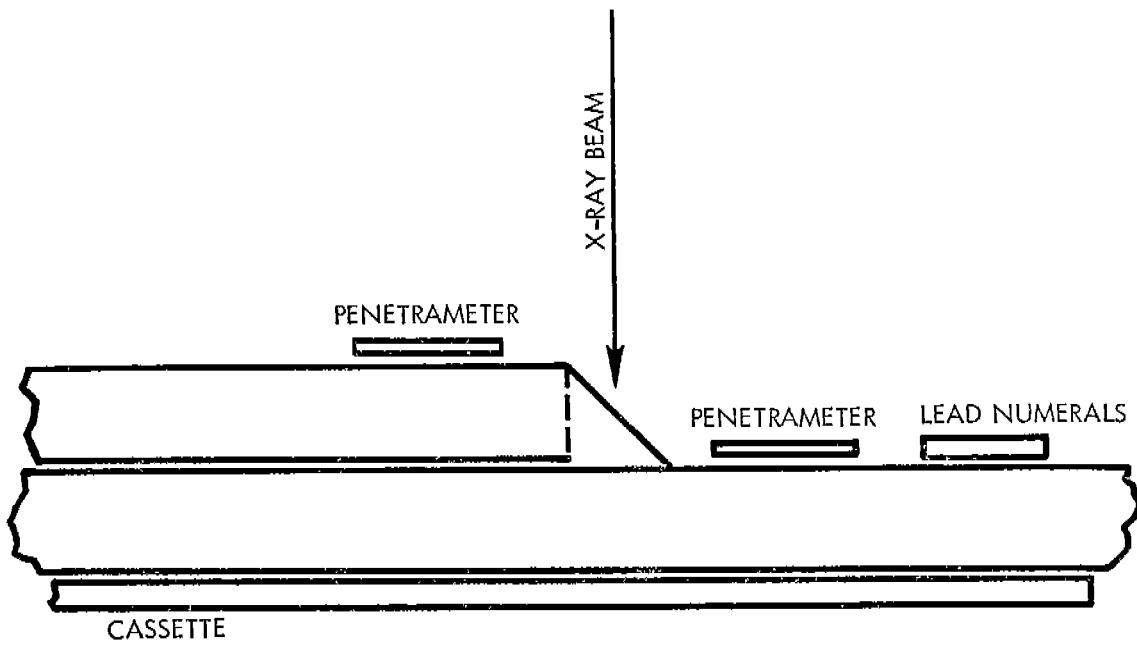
A ARRANGEMENT FOR PERFORMING RADIOGRAPHY OF A LAP JOINT WELD
